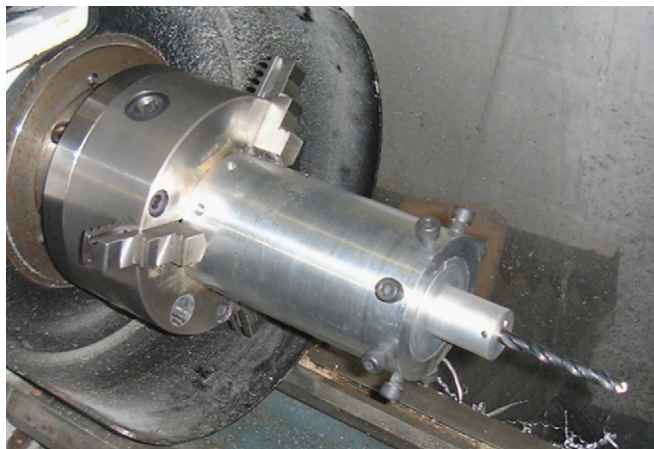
Longitudinal transducer mounted in a universal lathe.
